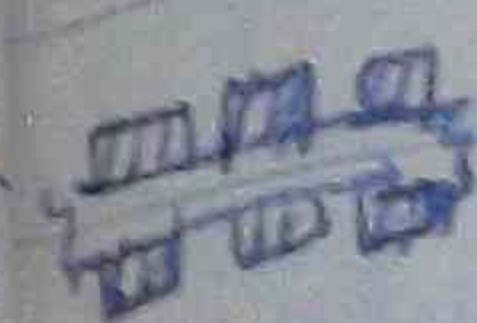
Shows the basic fillet weld and welds generally done by hand vibration of the are shown in fig (4). The factor governing the leg length of the type of weld is the thickness of the two plates making the joint. The rules of the classification societies give the leg length in relation to the important of connection and state also whether the weld is continuous or intermittent with intermittent weld the spacing of weld also stated.
